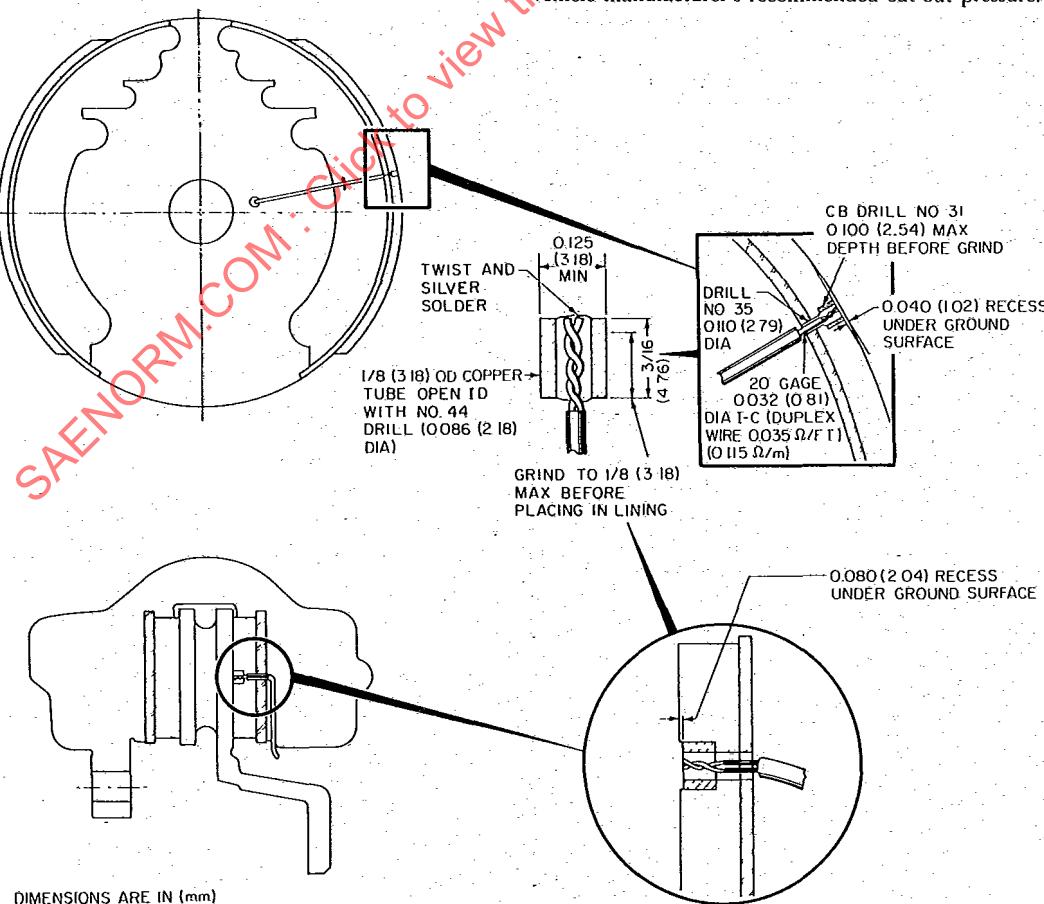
TYPICAL PLUG THERMOCOUPLE INSTALLATIONS
